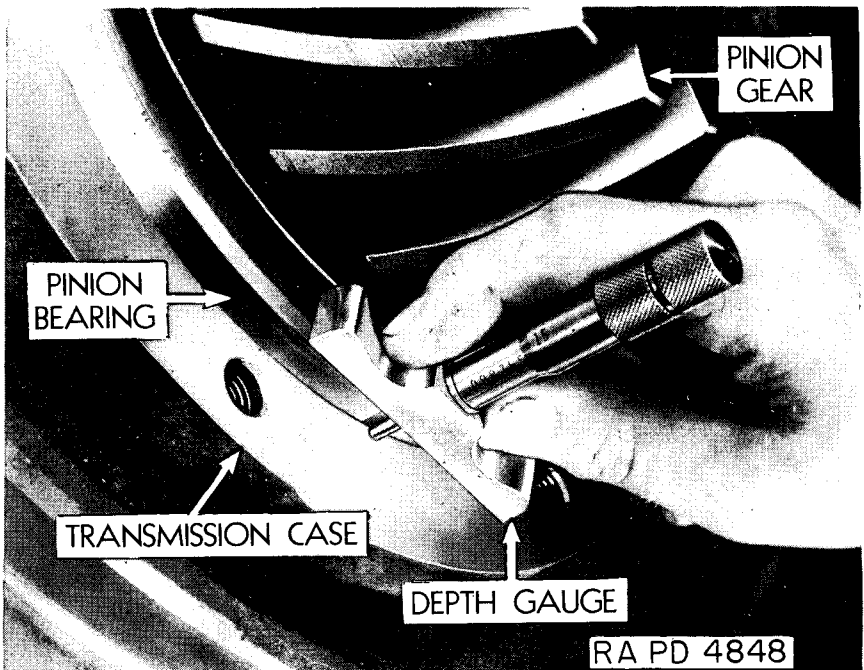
MEASURING PINION BEARING SHOULDER WITH DEPTH GAGE
